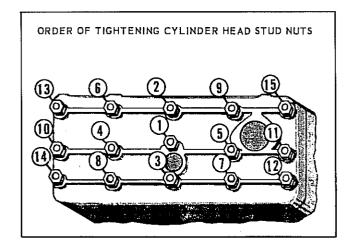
Cylinder Head Stud Nut Tightening Sequence
